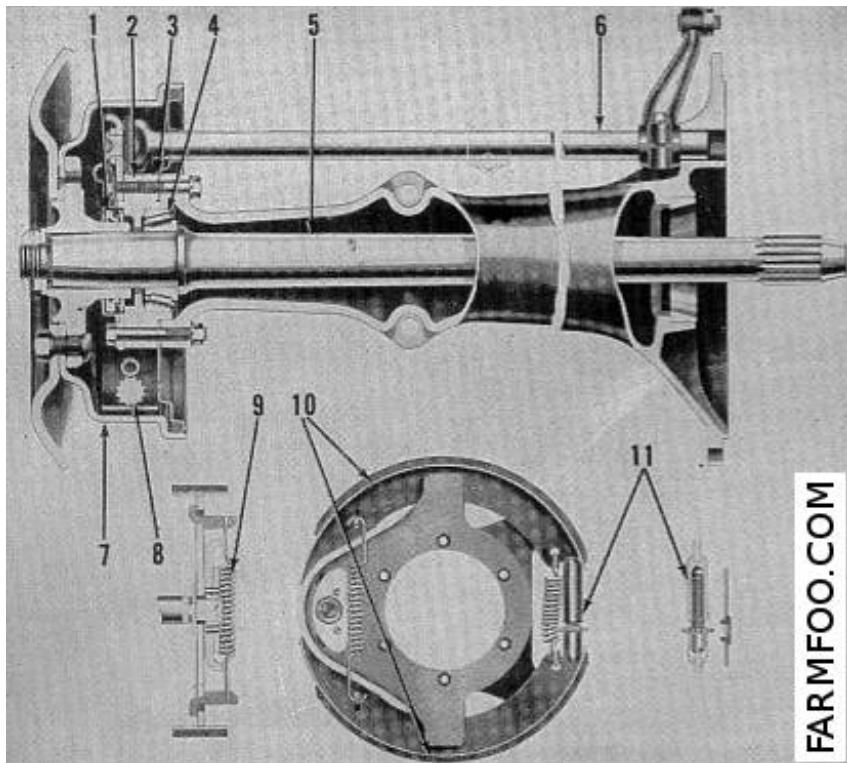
Left axle shaft and housing assembly on early model 8N. Later 8N models are similar except they include an inner oil seal (not shown) for each axle.
